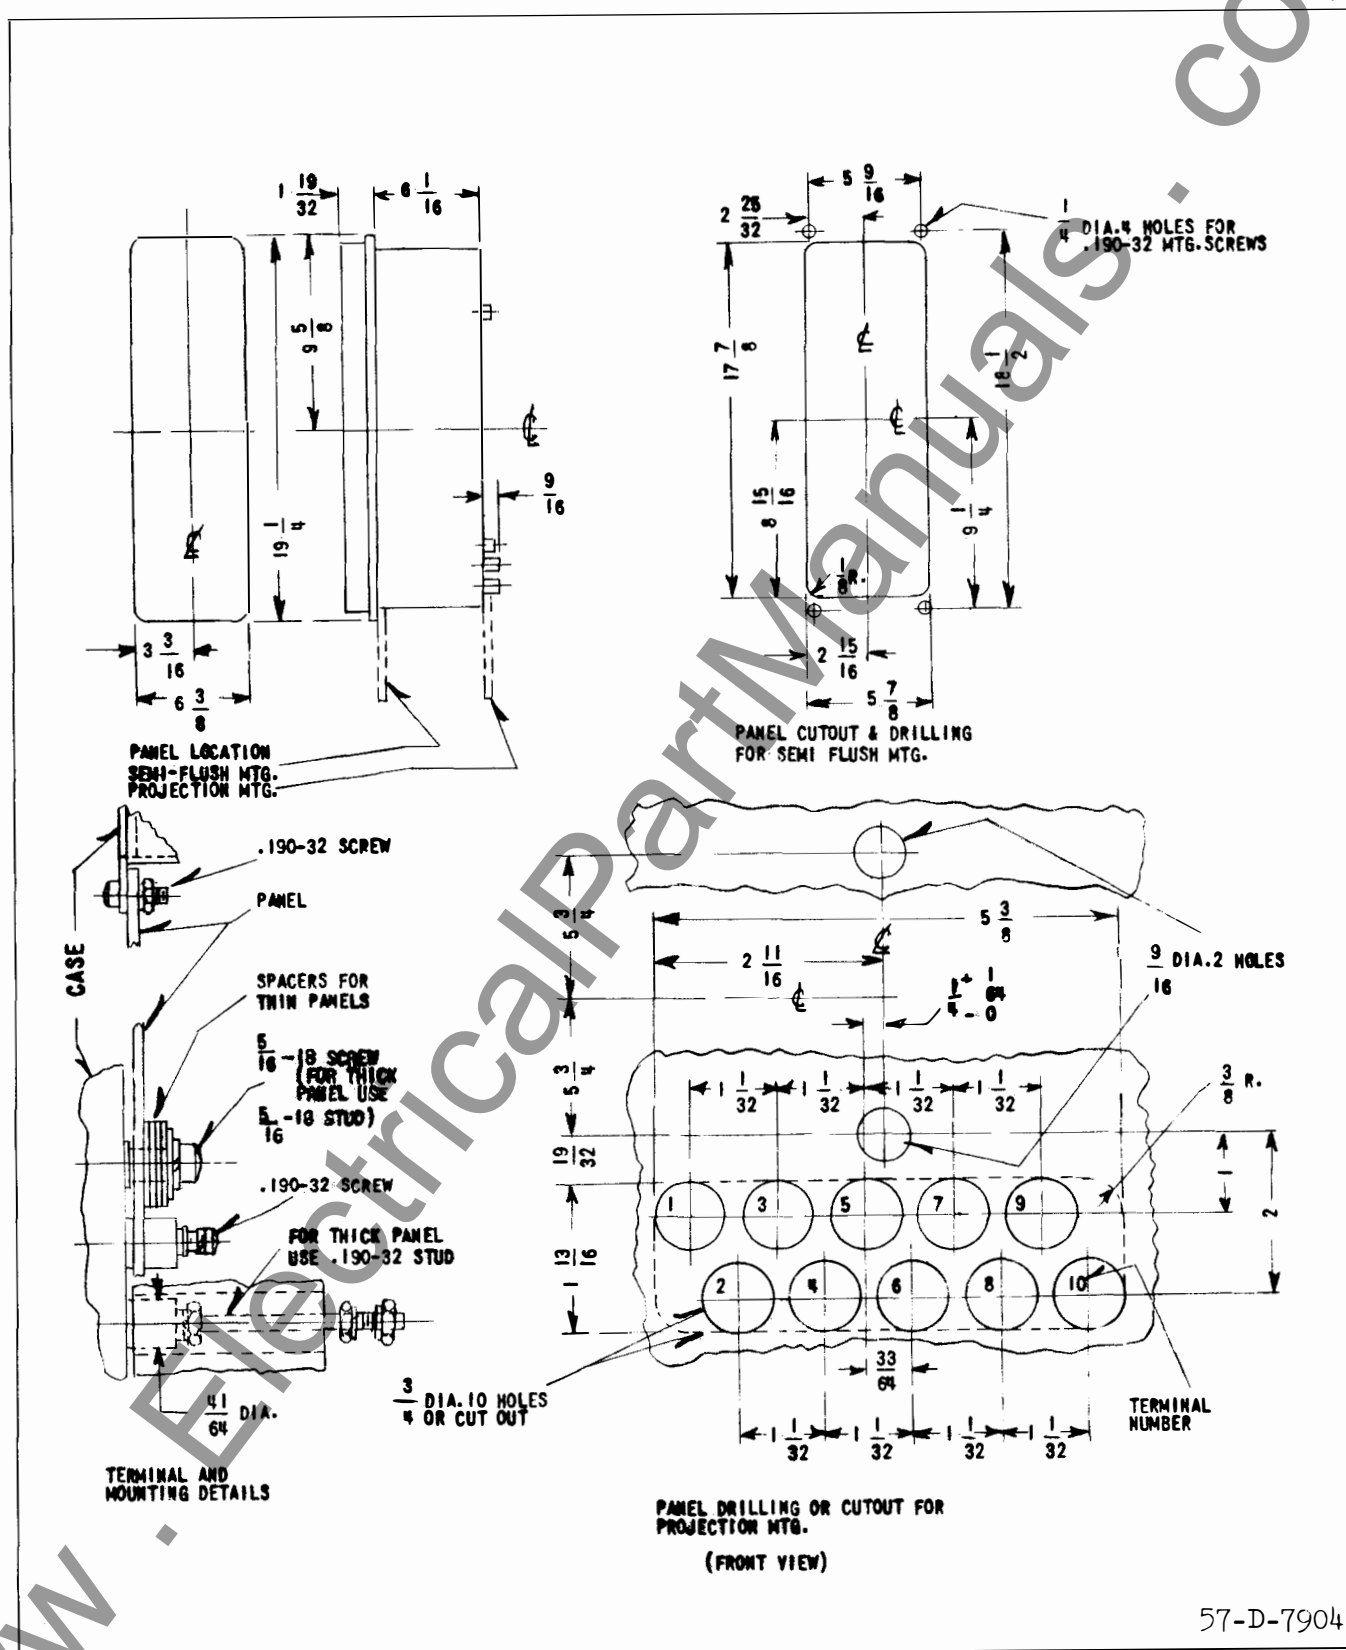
Outline and Drilling Plan for the Type FT41 Case
